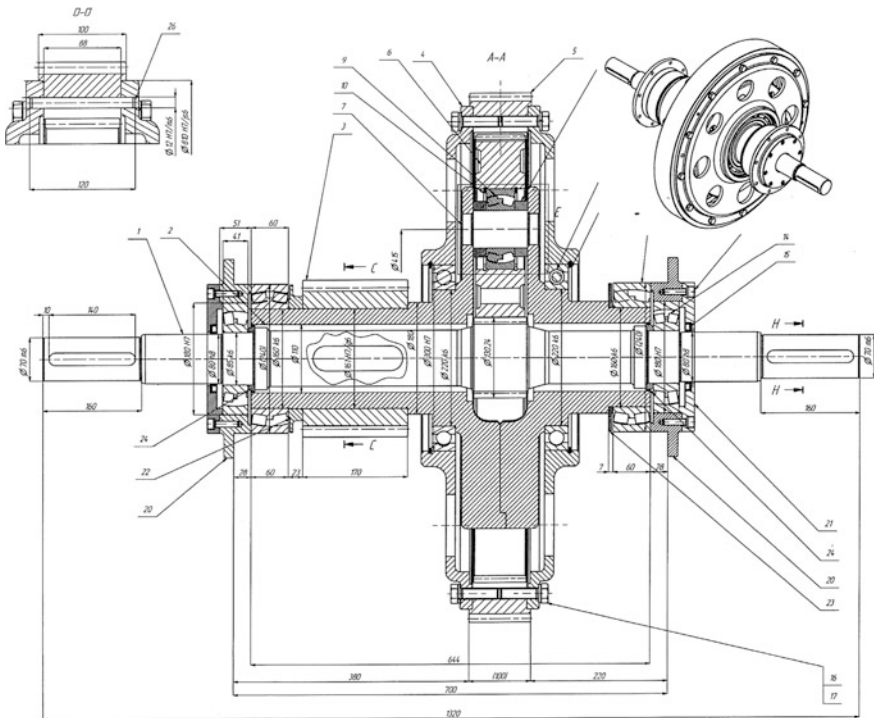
Planetary stage from the gear train shown in Fig. 7
